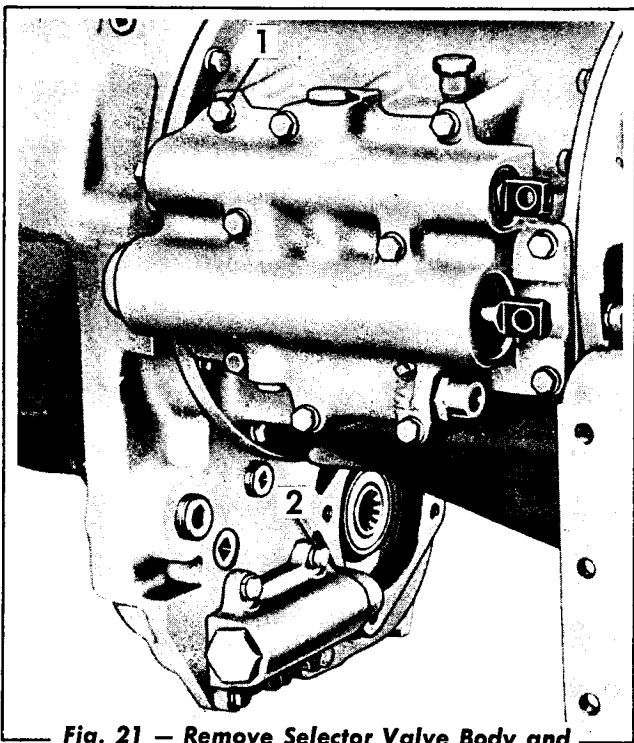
Remove Selector Valve Body and Main Pressure Regulator Valve Body
